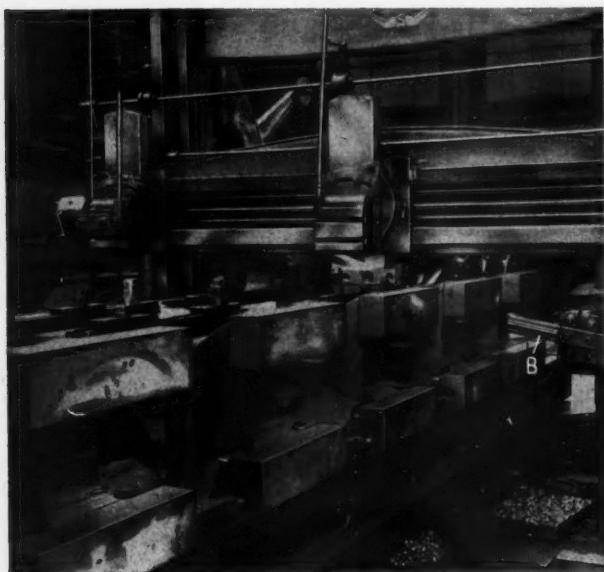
Planing operations on a complete set of six forged steel connecting rods for a marine diesel engine are performed at this set-up on a Stirk Hiloplane machine
